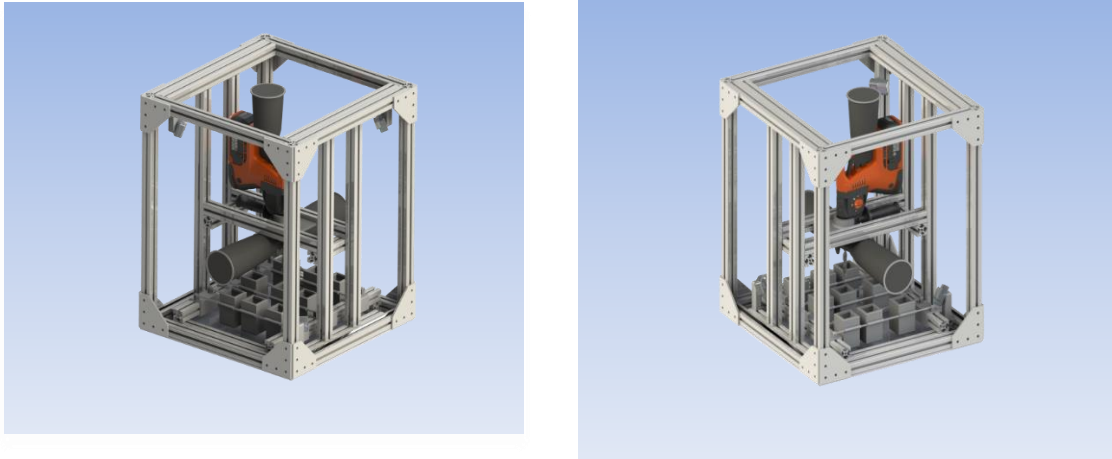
a) and Fig. 4 b) Drill rig sectional view
